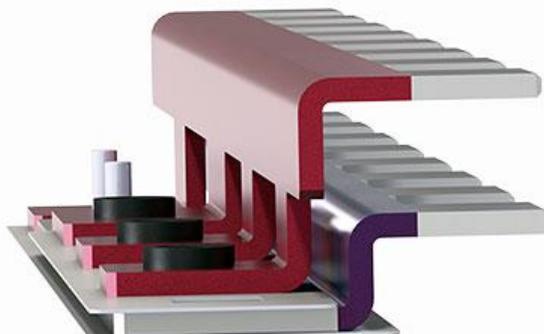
BusMate™ Accommodates Large Assembly Tolerances
